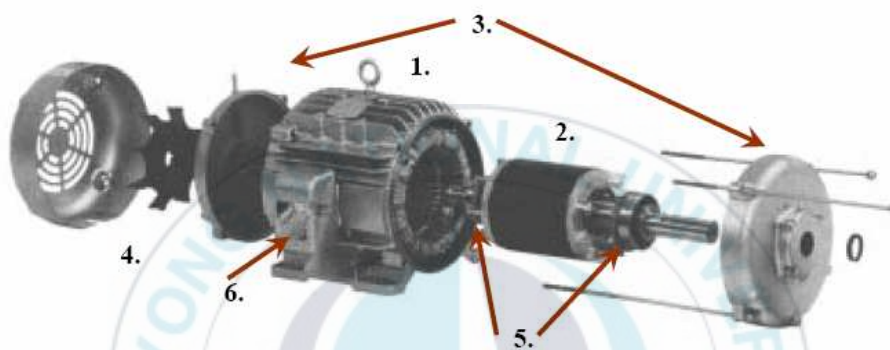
Exploded view of cage motor: Stator (1), Rotor (2) End-caps (3), Cooling fan (4), Ball bearings (5), Terminal box (6) [1].
